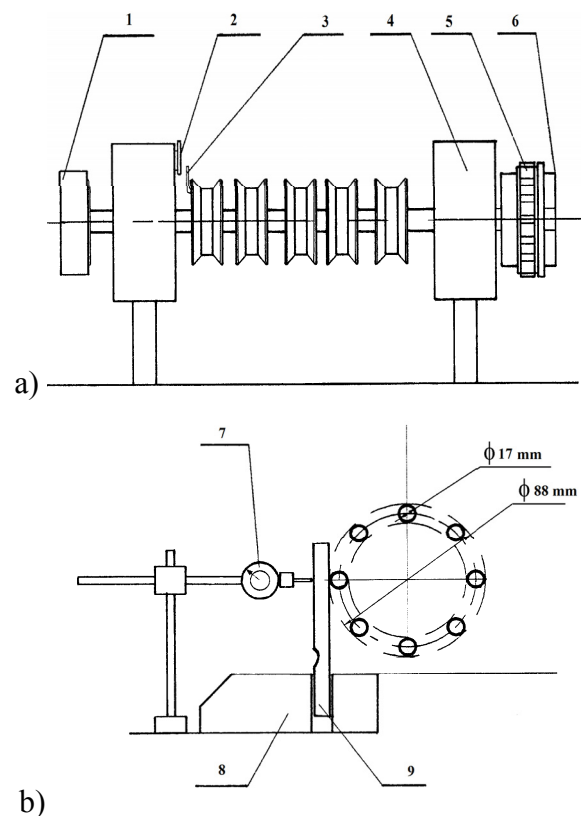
Loading mechanism: a) side view, b) front view; 1 – sheave with a V-belt, 2 – revolution measurement sensor, 3 – auxiliary part for the measurement sensor, 4 – main shaft bearing mount, 5 – bearing rings with rollers, 6 – fixing screw for the internal part of the bearing, 7 – dial gauge, 8 – vice, 9 – sample
